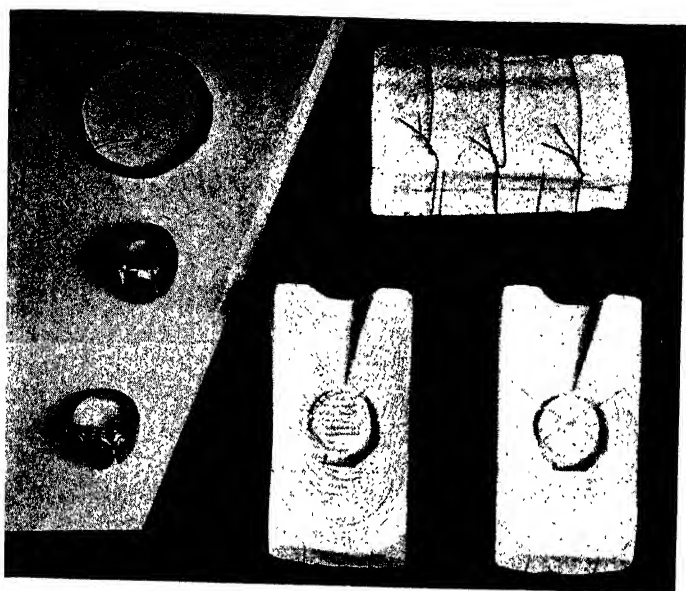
Cuttle-bone mold, tin pattern and finished ring
